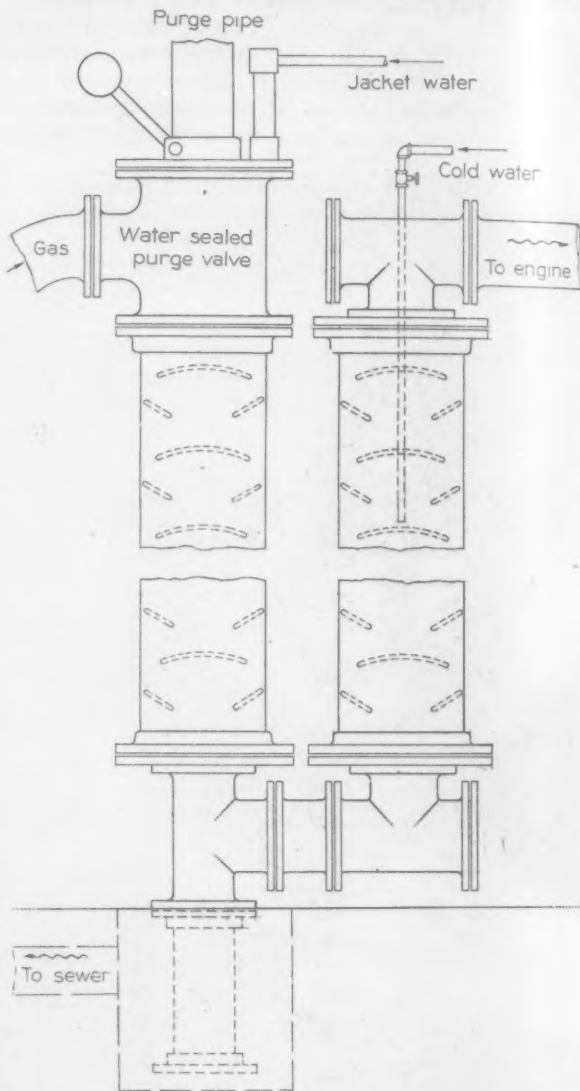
Sectional Elevation of the Baffle Scrubber Used.
